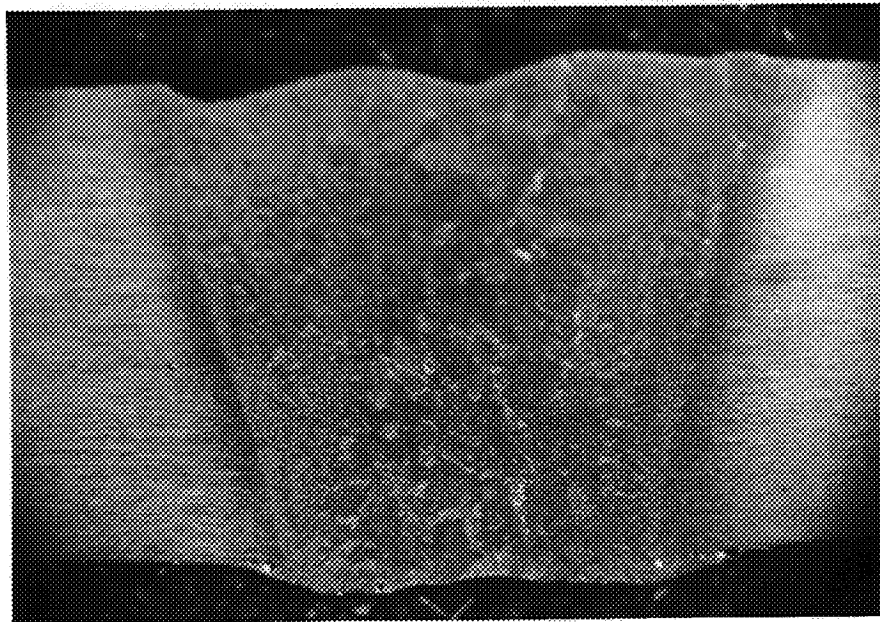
Surface of Al-Li Weld with Trailer.
